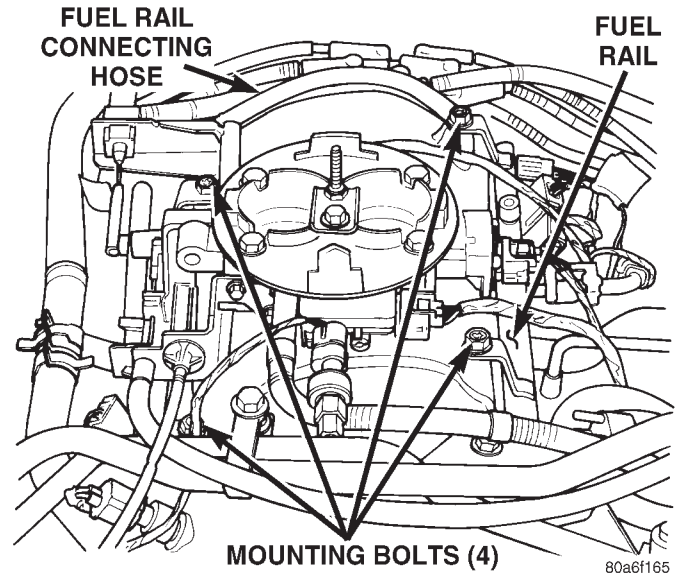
Fuel Rail—Typical(5.2L/5.9L Engine Shown)
